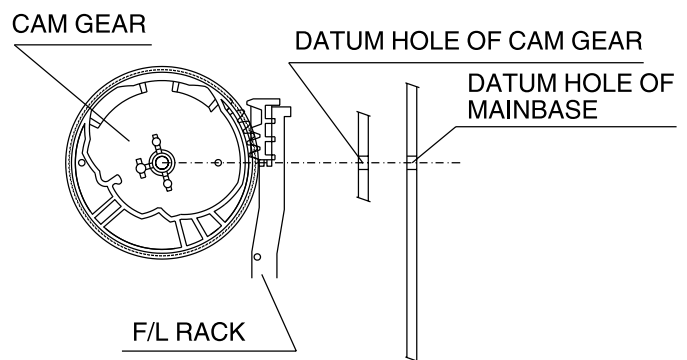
ASSEMBLY OF THE CAM GEAR & F/L RACK
